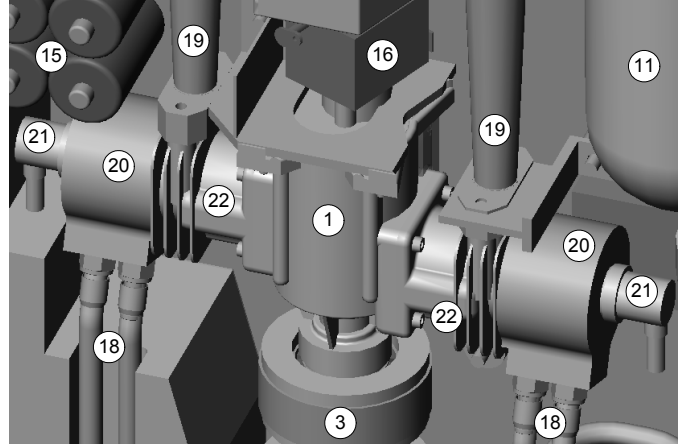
Detail of the engine depicting the cooling jackets on the cylinders. Engine (1); alternator (3); nitrogen tank (11); batteries (15); carburetor and throttle (16); hydraulic lines (18); exhaust pipe (19); cooling jacket (20); spark plug (21); cylinder head (22).
